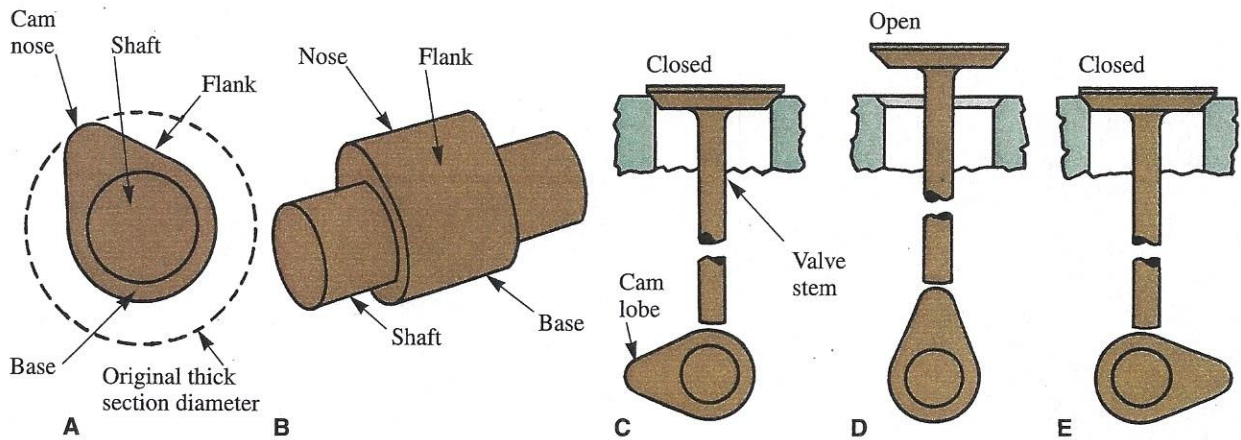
A, B—By grinding a round shaft into a cam shape, a camshaft is formed. C, D, E—When camshaft is revolved, cam lobe will open valve.
